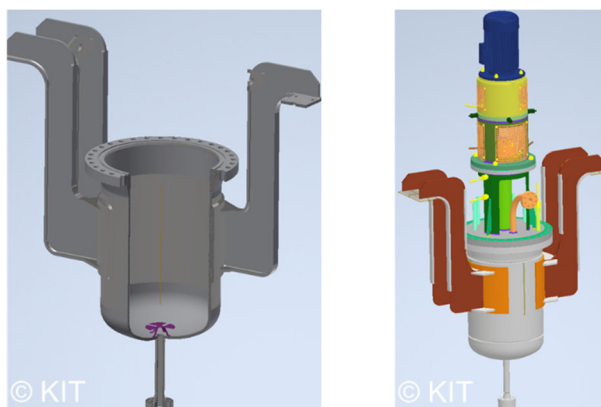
Pump tank for the liquid lead loop (left: 3D drawing, right: 3D drawing including immersed pump)
